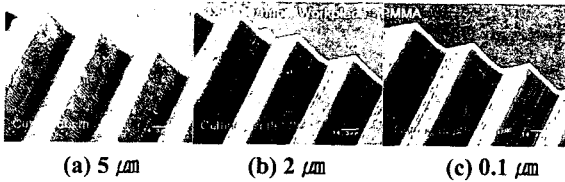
Prism pattern machined with different cutting depth(for PMMA)
